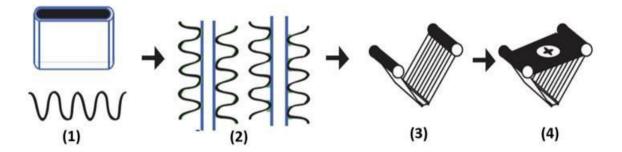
ACC assembly example. (1) Attachment of fins to tubes in a single row by brazing. (2) Tubes assembled into bundles. (3) Two bundles connected to the same header. (4) Fan mounting structure connected between the tubes.
